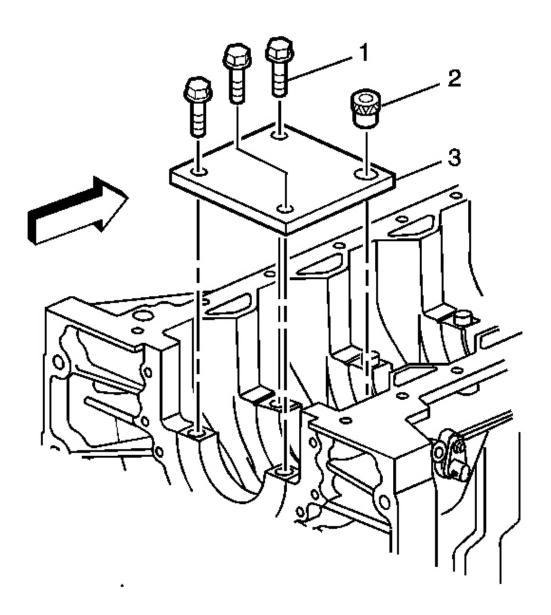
View Fixture Plate & Bolts - Crankshaft Main Bolt Hole Thread Repair Courtesy of GENERAL MOTORS CORP.
